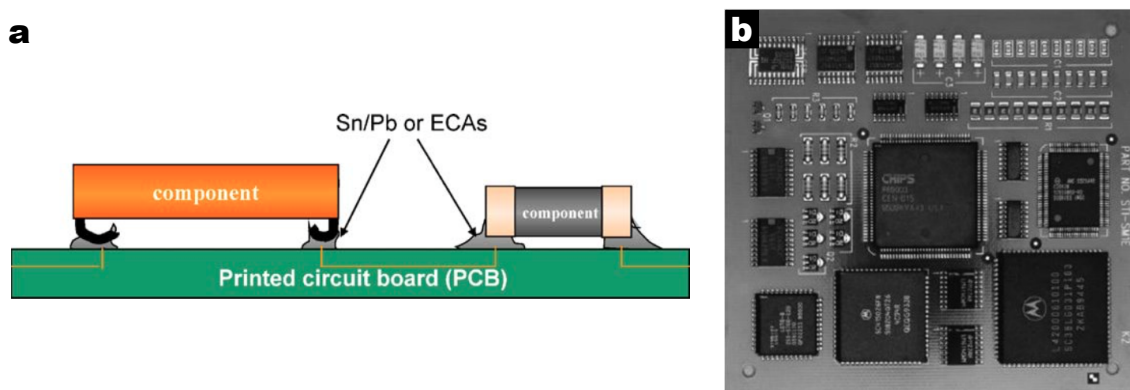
a) Schematic illustration of how an interconnect material joins a functional component onto a PCB (Reproduced with permission Copyright 2006, Elsevier) [1]; b) Example of fully-assembled circuit board that used surface mount technology to join the component to the PCB (Reproduced with permission Copyright 2016, Elsevier) [28].
